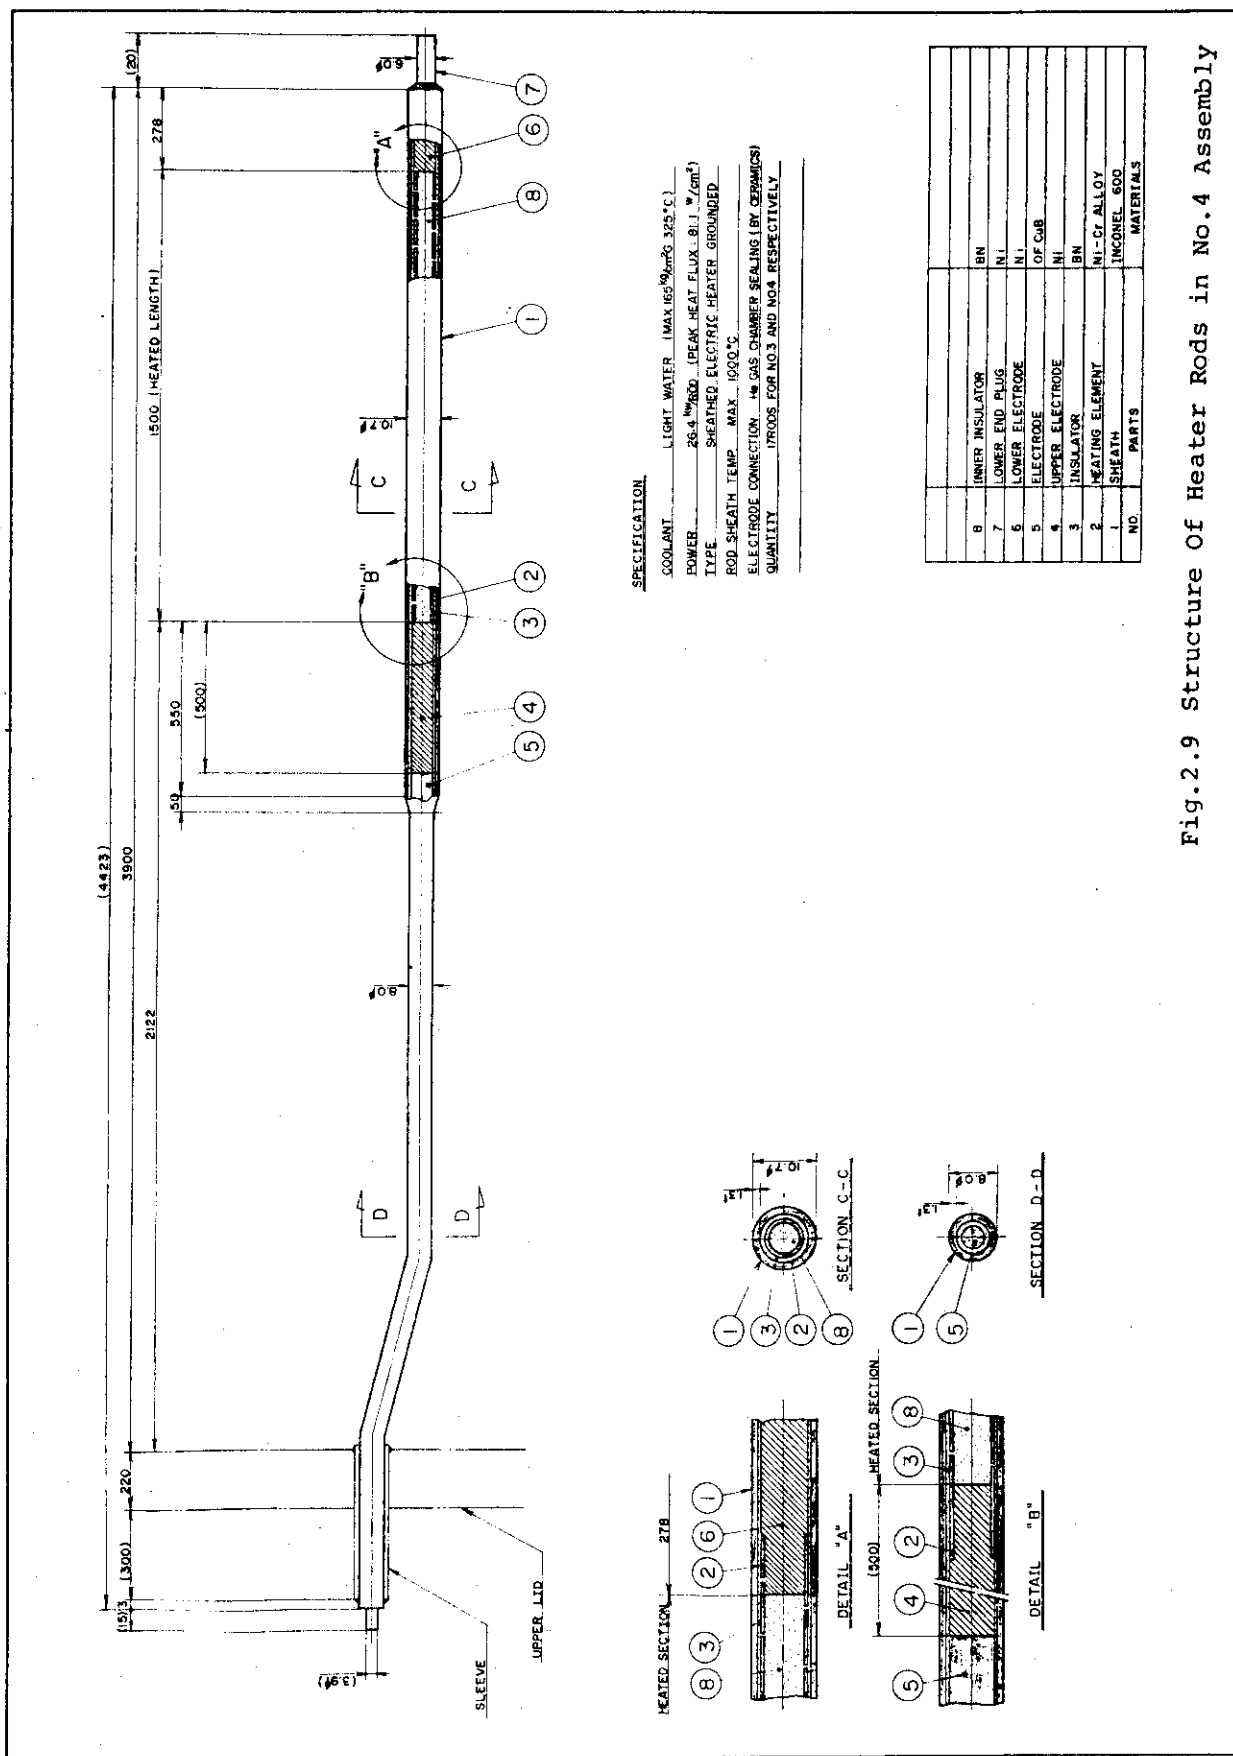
Structure of Heater Rods in No.4 Assembly
